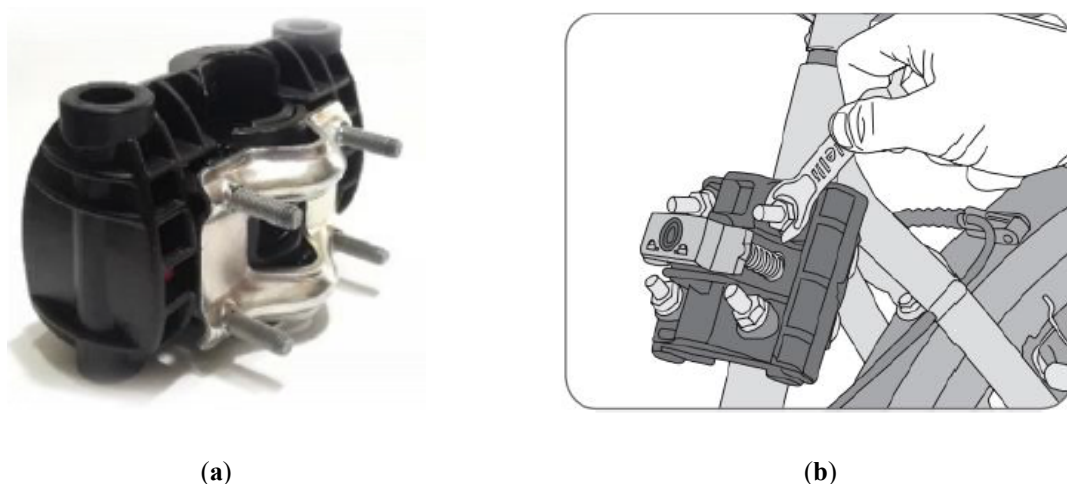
(a) coupling system device [33], (b) coupling system assembly demonstration [34].
